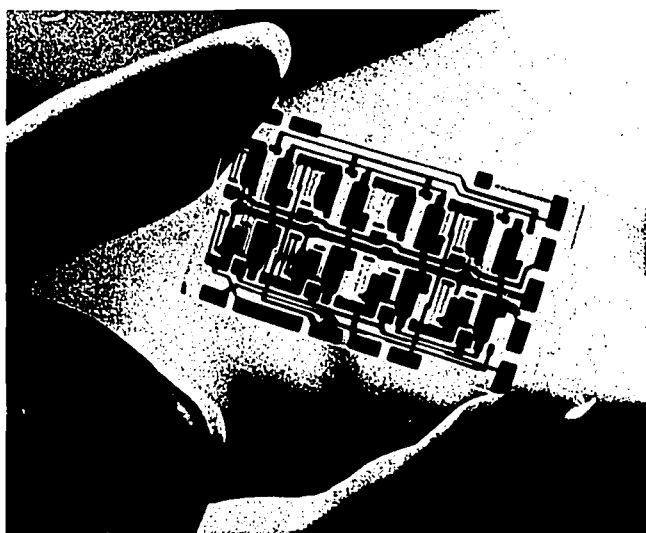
This is an example of a printed circuit board after etching. The dark lines are strips of copper which remain on the front and back surfaces of the plastic.
